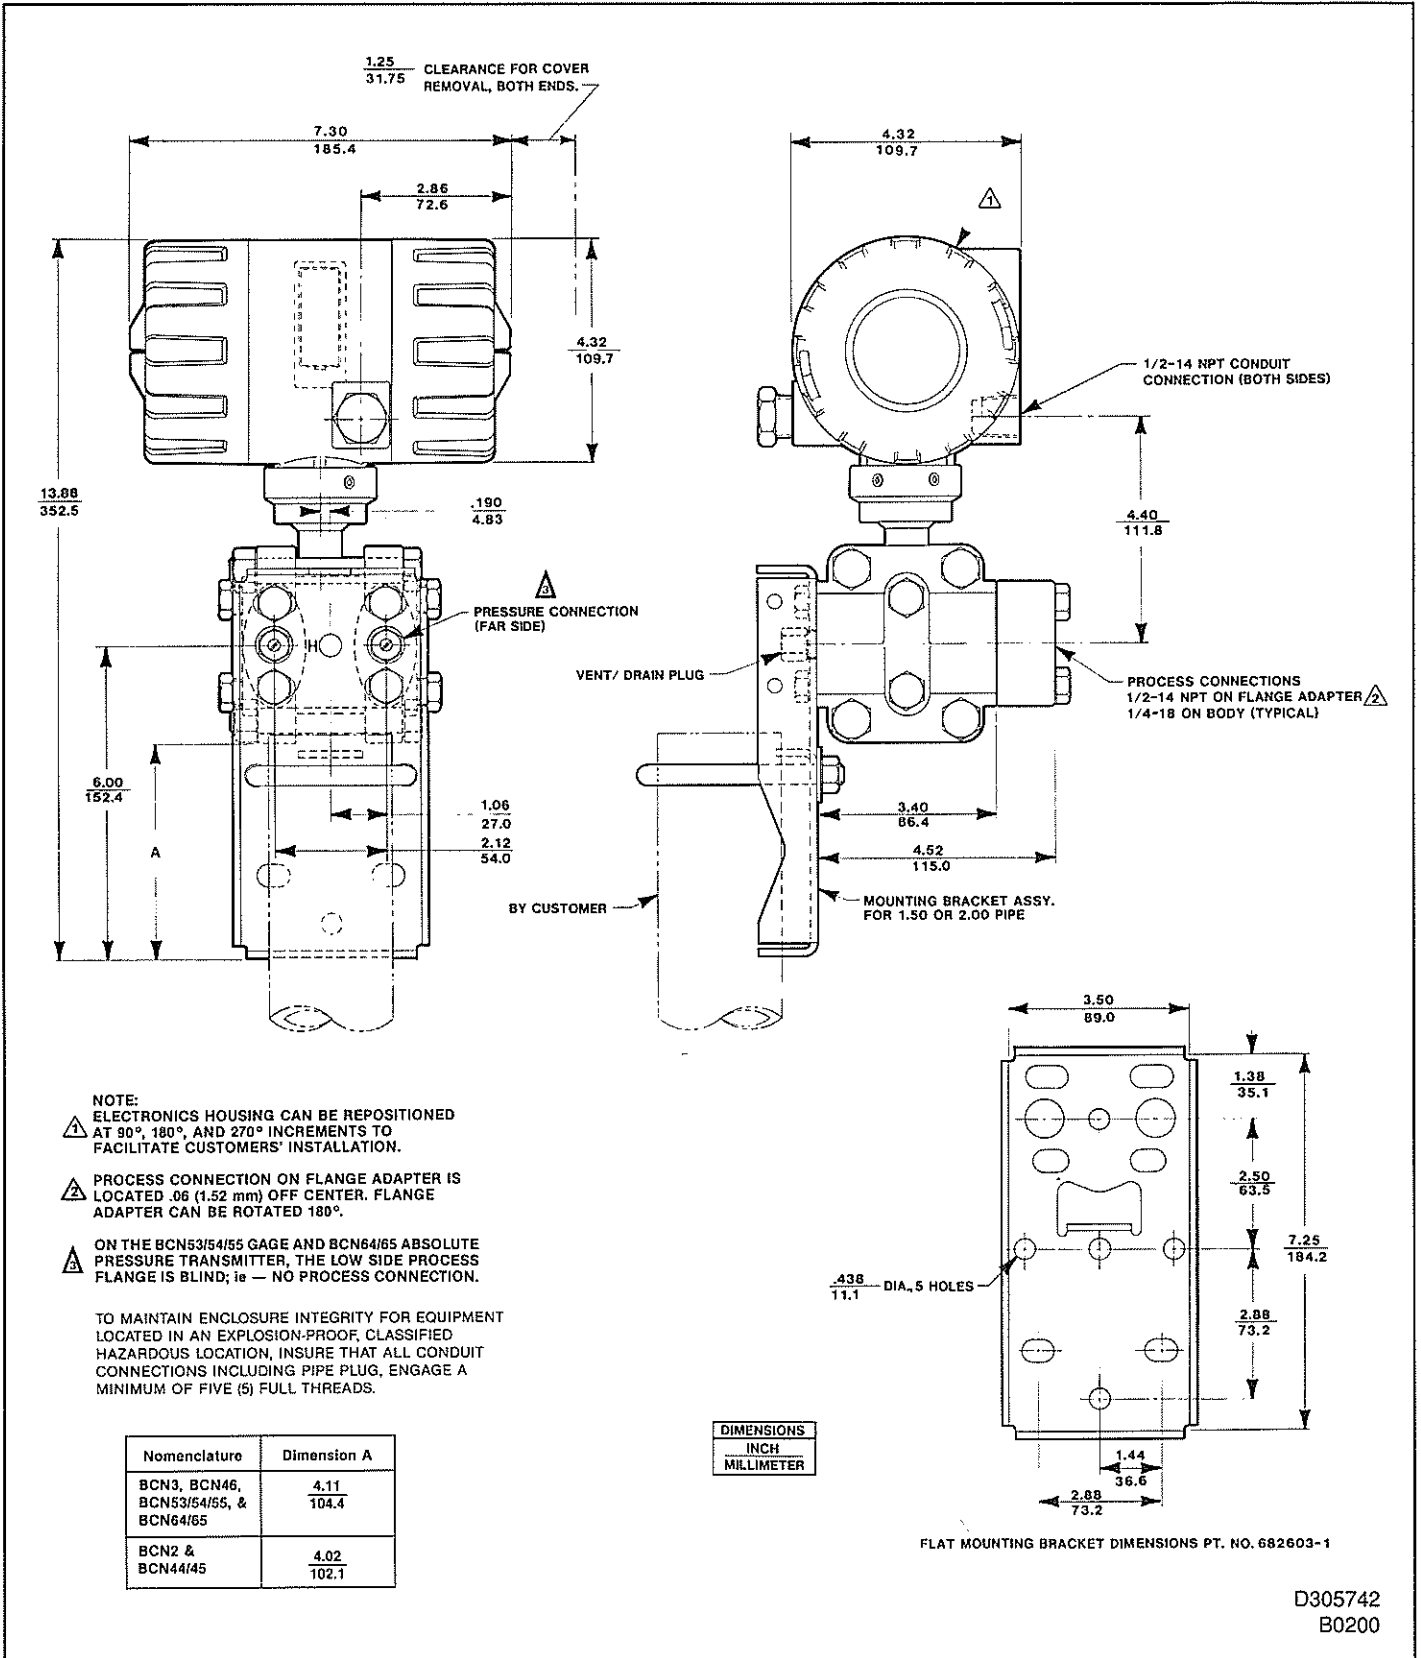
External and Mounting Dimensions (Smart BCN21314, BCN53154155, and BCN64165)
